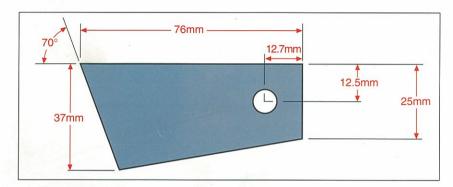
Dimensions for the steering arms. Two steering arms are required, one for each stubaxle carrier.
